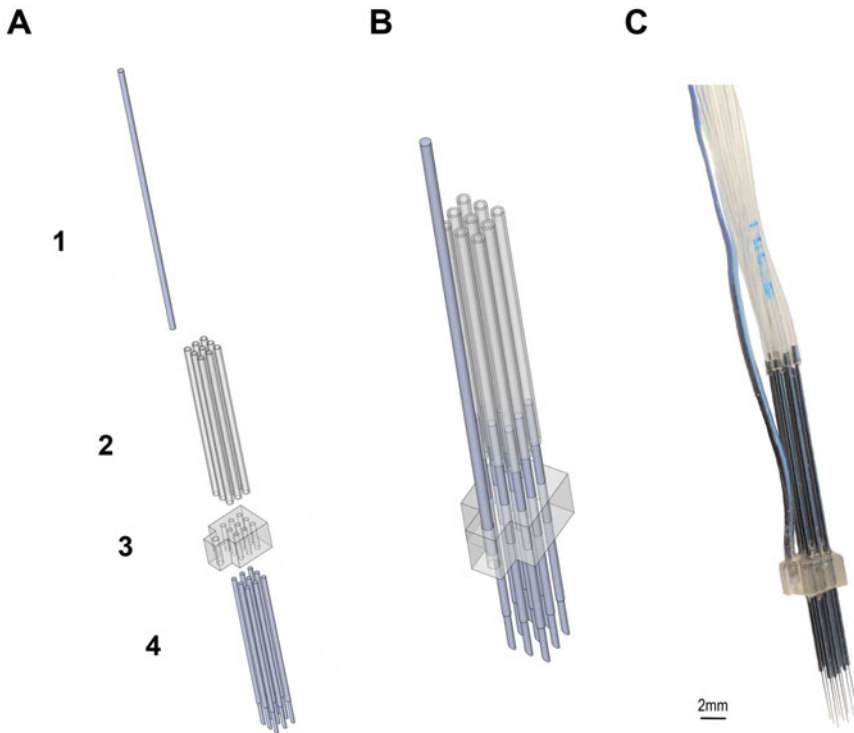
Linear 3 × 3 microinjector array. (a) Components of linear 3 × 3 array: (1) 23G wire, (2) silicone tubing, (3) 3D-printed manifold, (4) 33G needles. (b) CAD model of assembled array. (c) Photograph of assembled array
